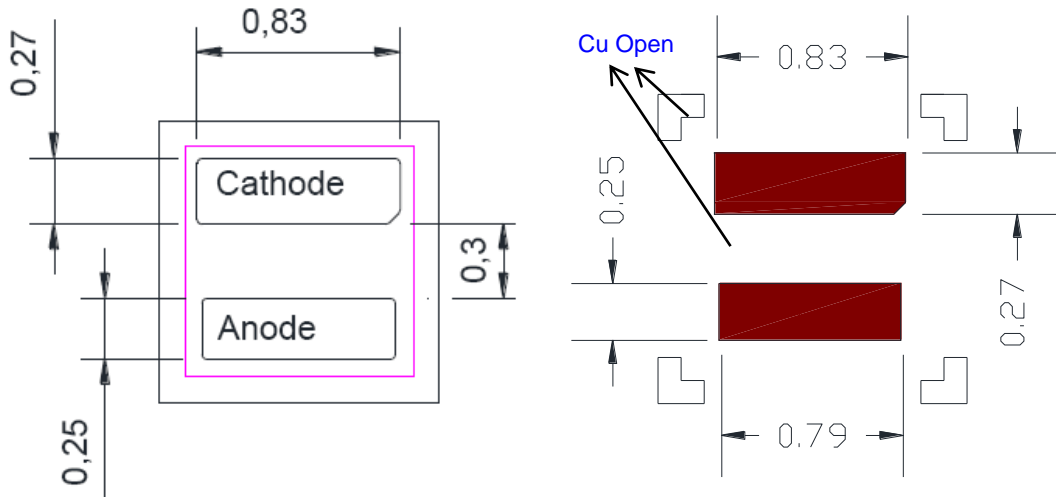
(a). Referenced PCB Footprint for. Y11 All dimensions in mm.
